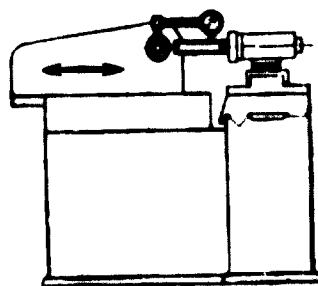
Parallelism between the Spindle Axis and the Direction of the Infeed Movement (Universal Grinding Machines)
